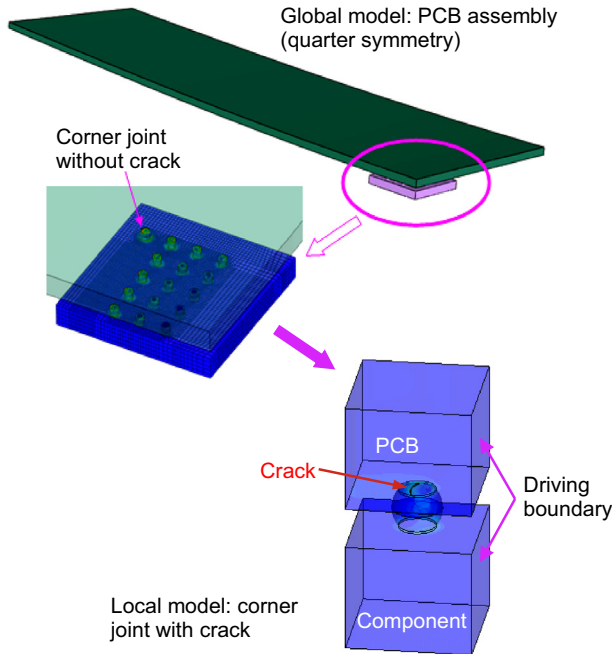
Global-local model of the PCB assembly and the corner solder joint.
